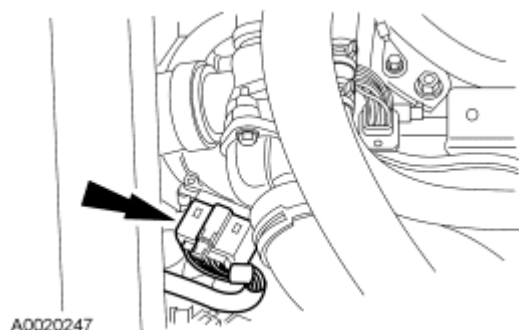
Locating Transmission Range (TR) Sensor Electrical Connector
